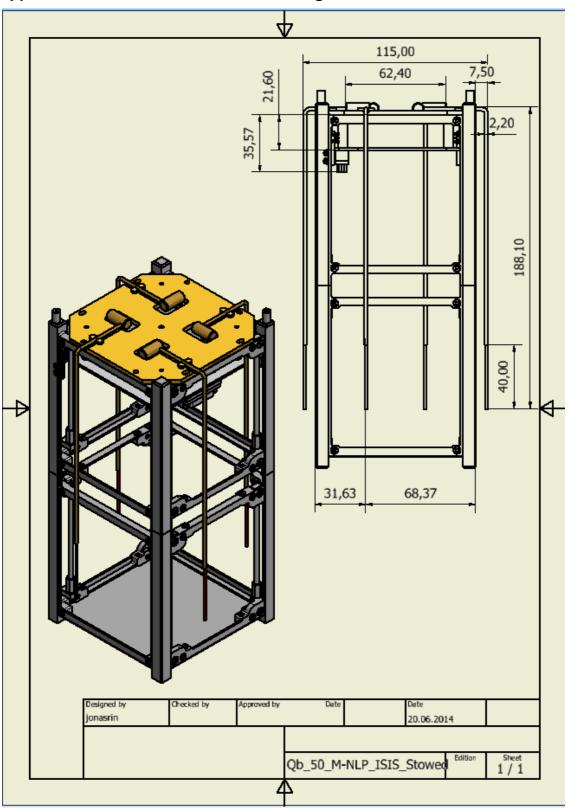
M-NLP Science Unit Mechanical Interface Drawing
